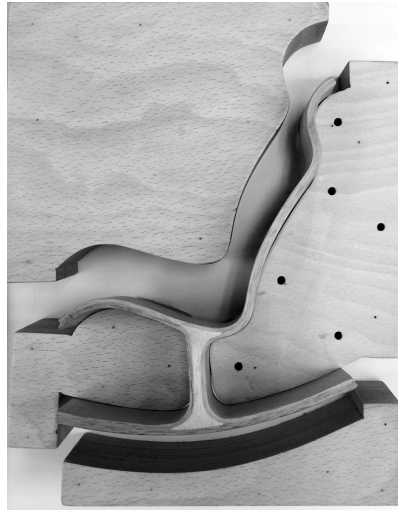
Four-part mould for Heron rocking chair by Mitsumasa Sugasawa; the wide piece is moulded first as shown and is later sliced into multiple side frames.
